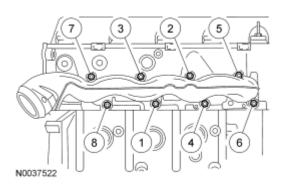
Exhaust Manifold Nuts Tightening Sequence Courtesy of FORD MOTOR CO.
